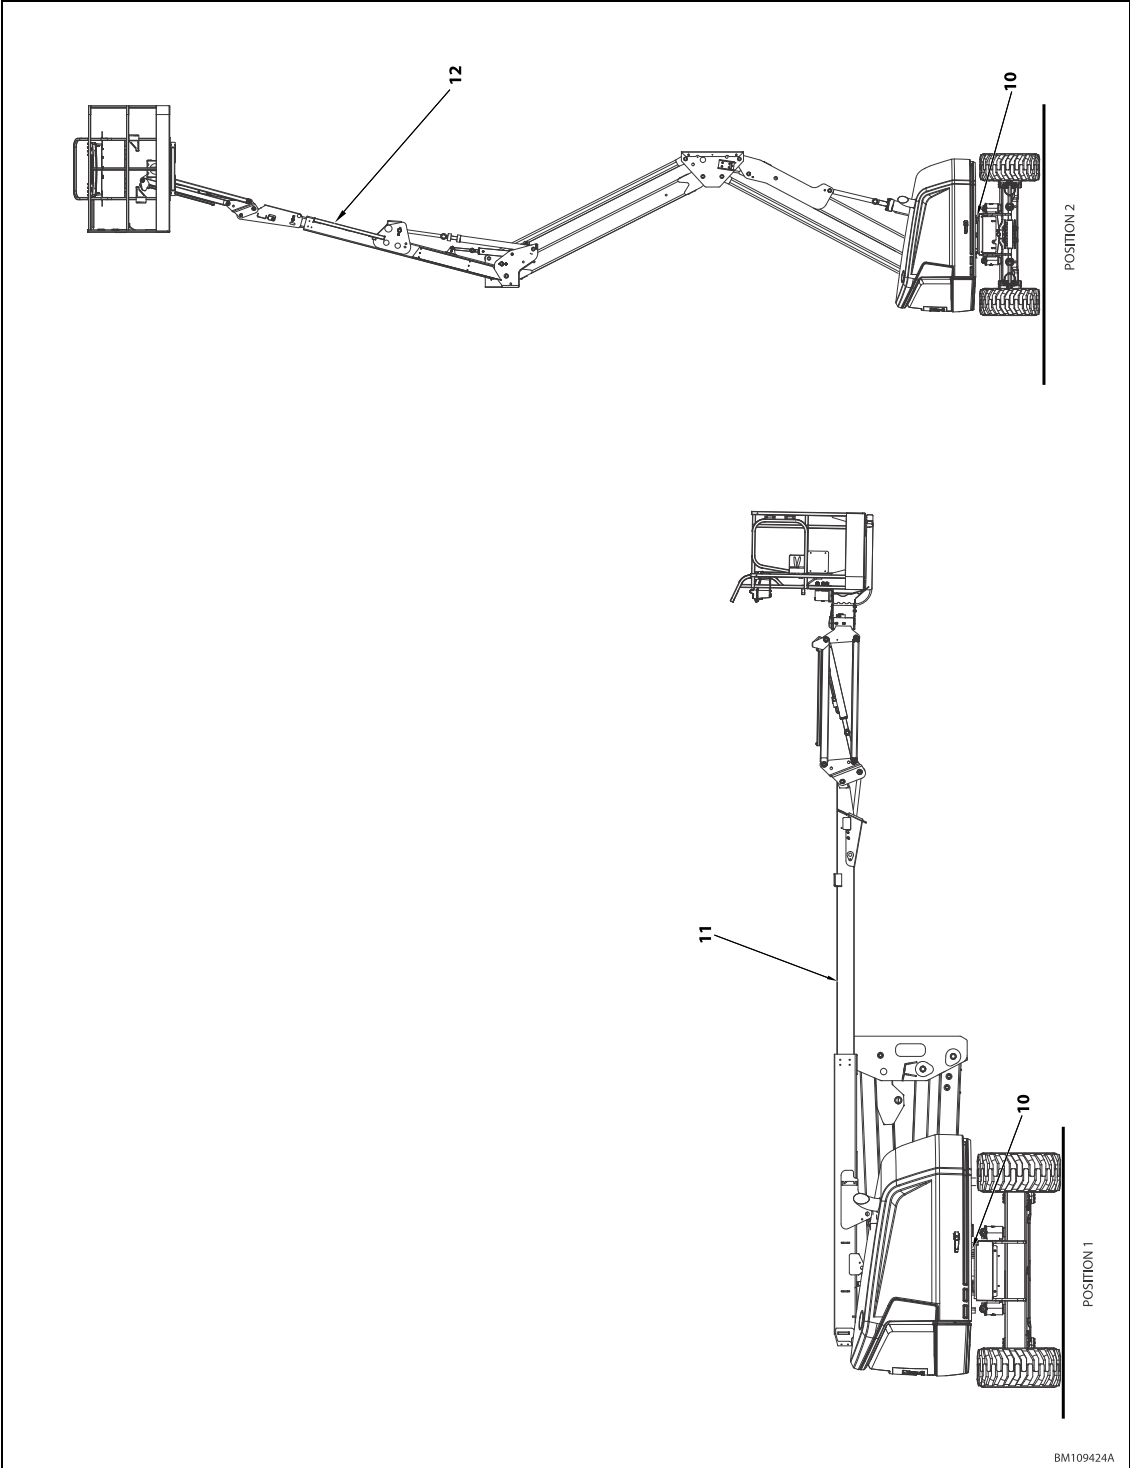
Swing Bearing Tolerance Measurement Location and Boom Placement
